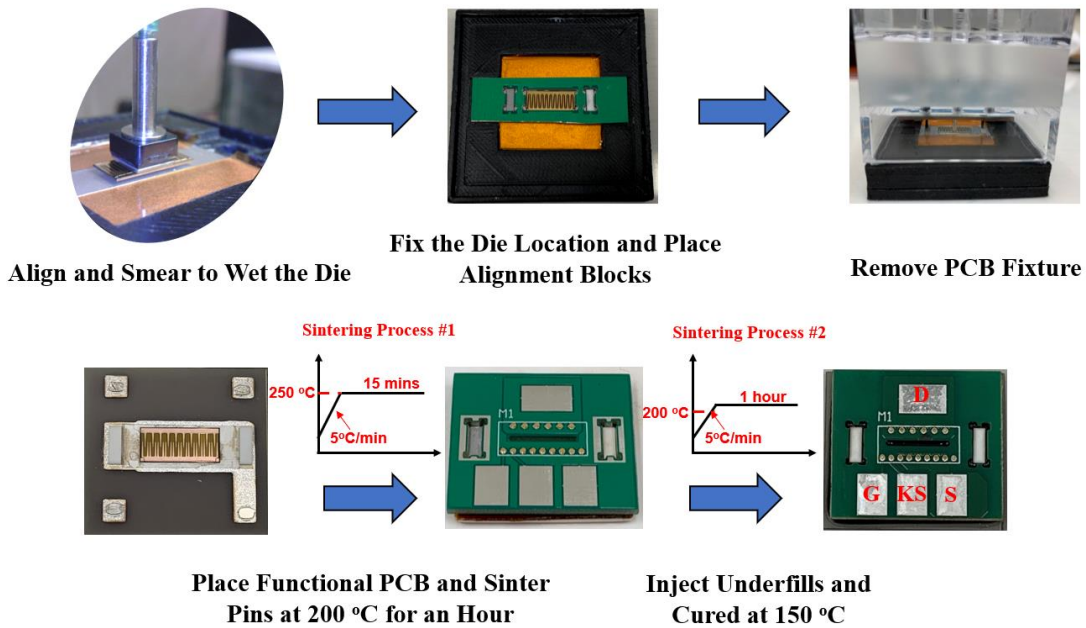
The fabrication process of the PCB-interposer-on-DBC package in Fig. 2-6. The alignment blocks and the die were fixed by a PCB fixture and sintered on an etched DBC. The functional PCB was guided by the alignment blocks and aligns the pins to the die's bonding pads.
